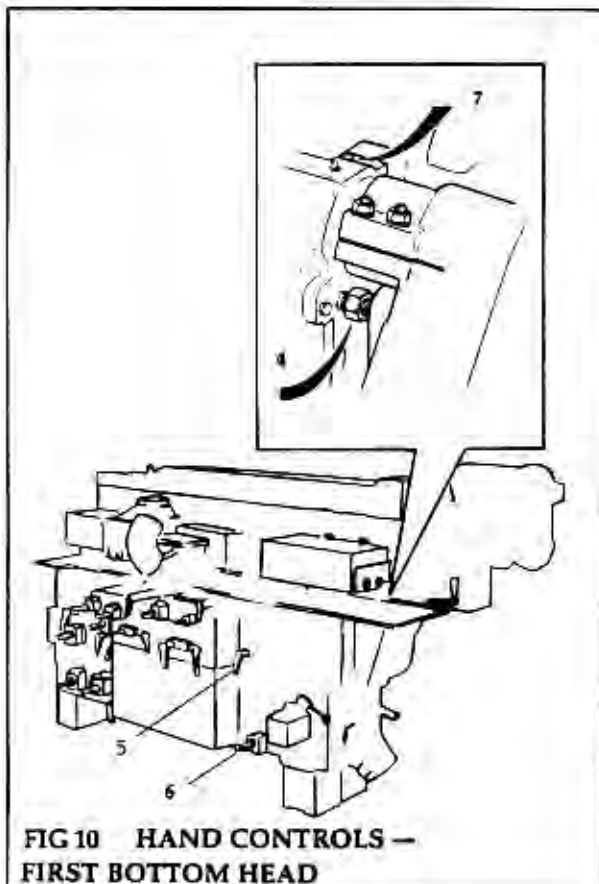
HAND CONTROLS — FIRST BOTTOM HEAD
